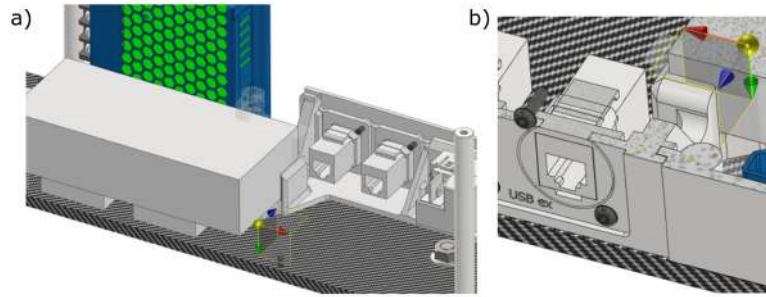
a) The position of the projector power supply unit on two 3D printed pads and b) the grove-and-wing connection between housing and the panel for sockets.
